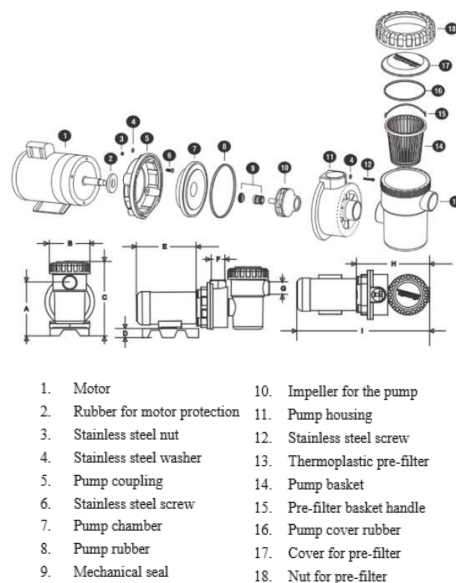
Illustrative image with exploded view of the Pump with Prefilter and legend with numbering of pump components.
